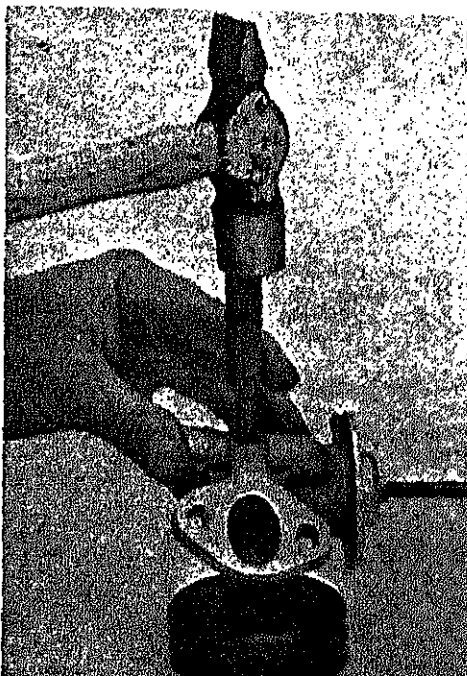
Removing the bushings of the throttle shaft by means of tool 9201 0236.
